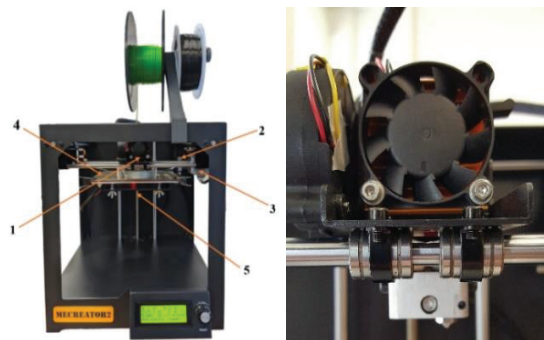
Modified *MeCreator 2* printer: 1 – printhead; 2 – Y-axis motor; 3 – X-axis motor; 4 – printing platform; 5 – Z-axis motor
